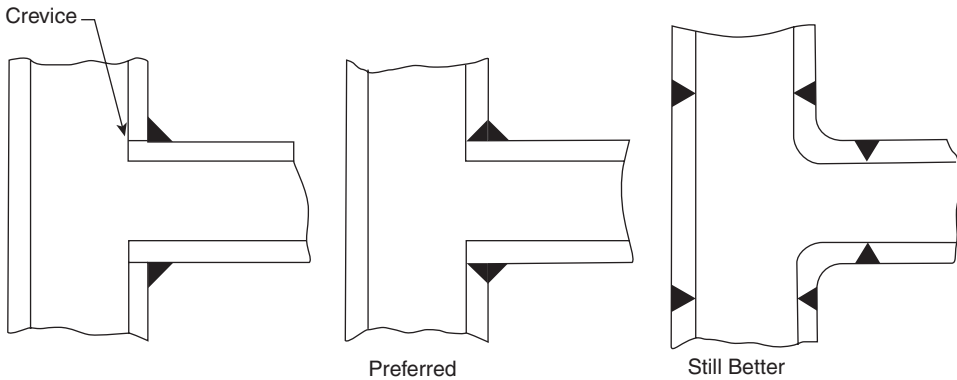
Designs to avoid crevices caused by incomplete weld penetration
